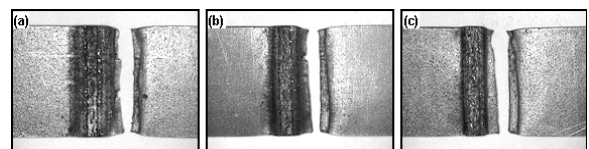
Appearance of fractured specimens after perpendicular tensile direction: (a)1.5m/min, (b)2.4m/min, (c)3.6m/min
